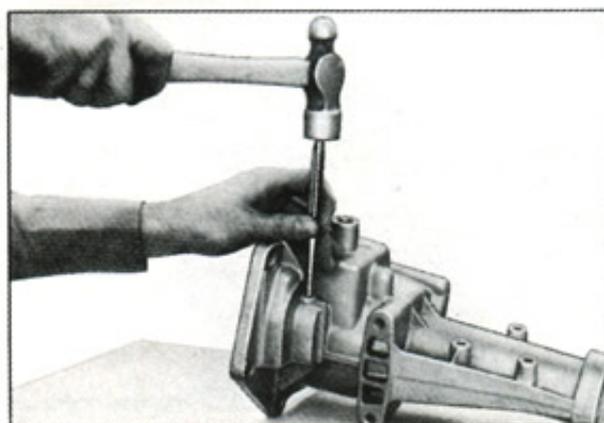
Removing Reverse Idler Shaft Roll Pin
